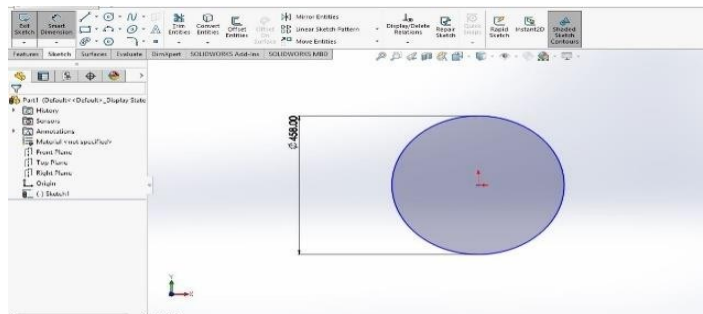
Rim Drawn in Solidworks with diameter 458mm.
